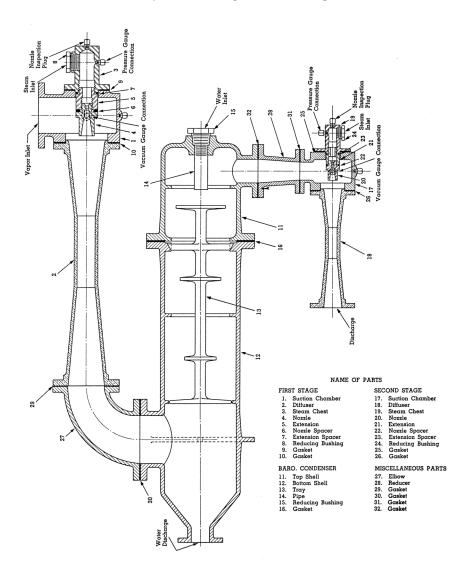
Two-stage ejector with contact intercondenser, assembly. (Courtesy Unique Systems, Inc.)
